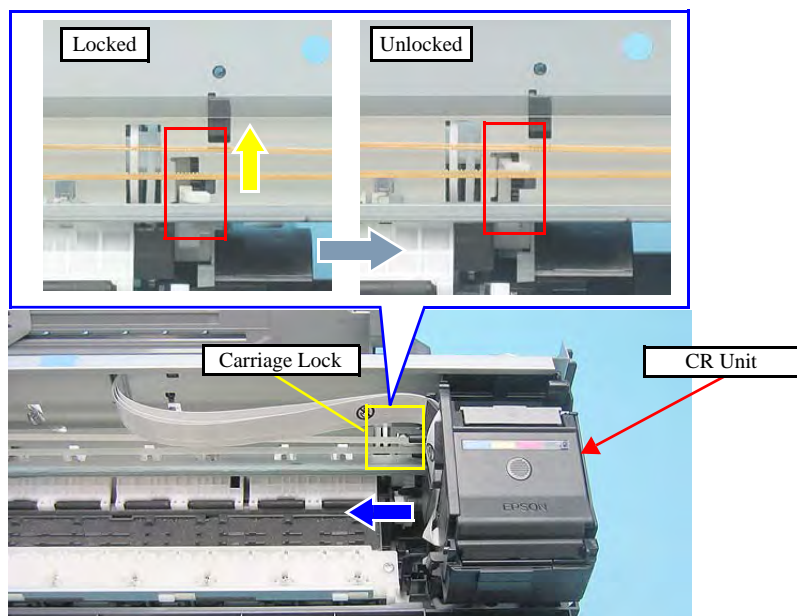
Unlocking Carriage Lock and Moving CR Unit to the Center
